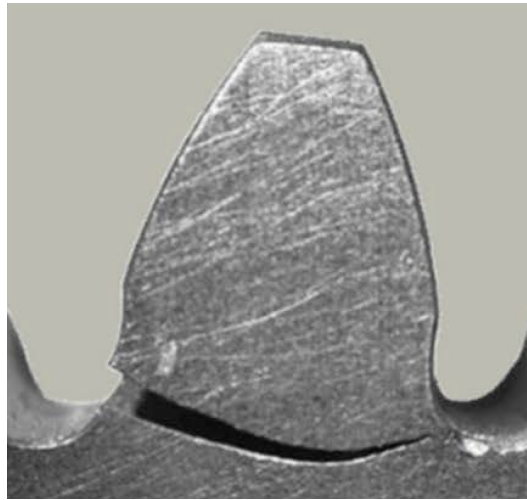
Root bending stress fracture of gear tooth (Boiadjiev et al., 2014)
